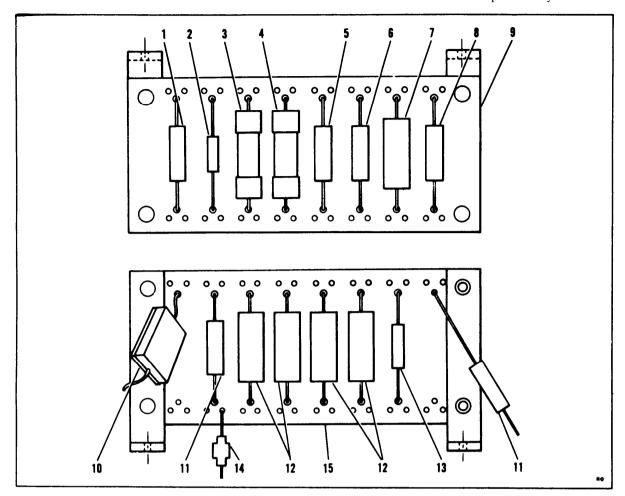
Printed Circuit Board Assembly, Part No. 400D-75G
